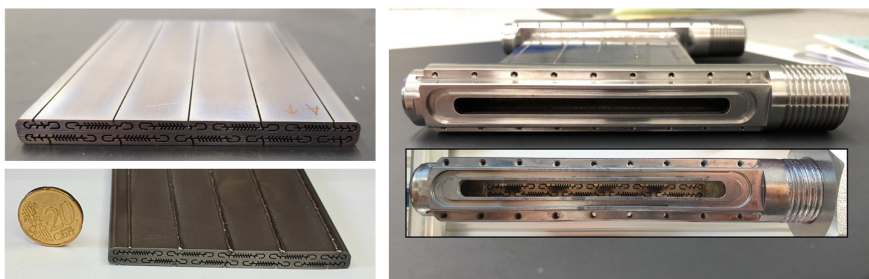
Top left: tantalum target with outdated design after wire erosion process; bottom left: weld lateral entrees from wire erosion; right side: welded tantalum target to tantalum supply tubes (outdated design)
